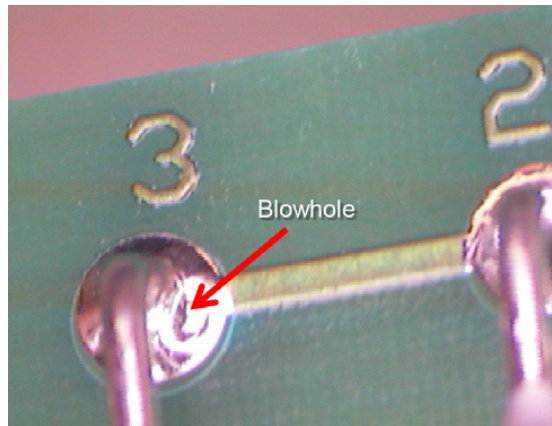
Example of a blowhole seen from the flowed fillet side of the circuit board (Eutectic flux cored solder, joint F3).
